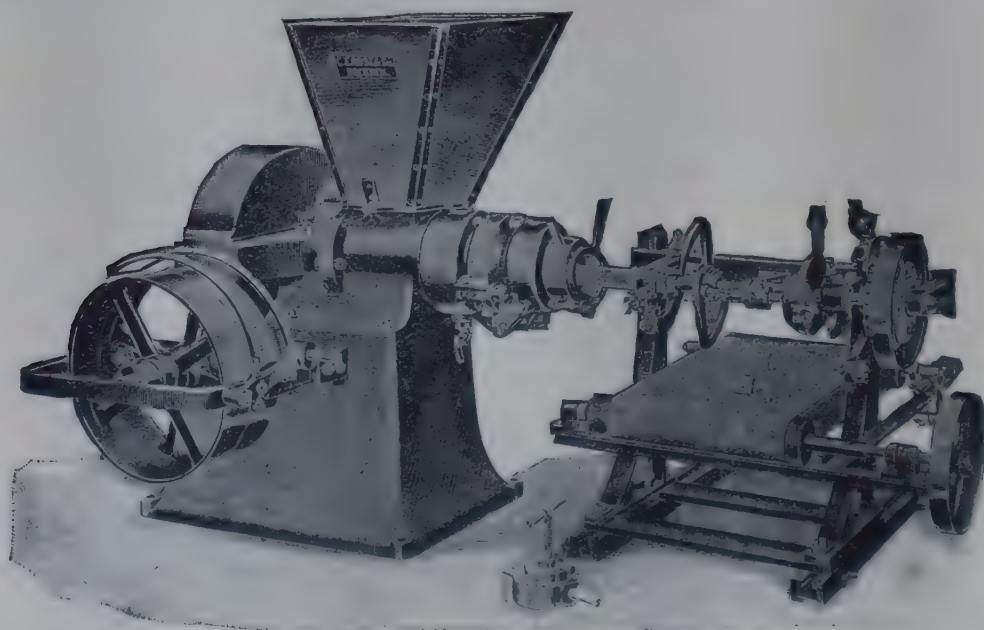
Plodder, showing automatic arrangement for cutting the bar of soap into small pieces for stamping. (Rost & Co., Dresden.)
